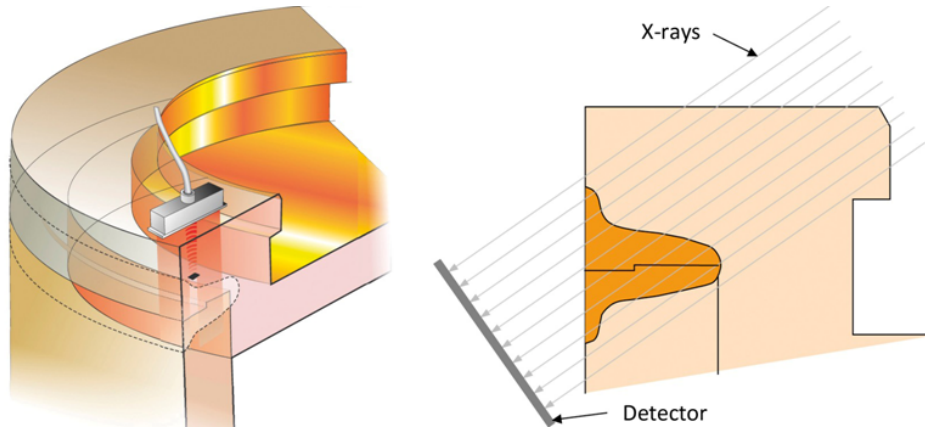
Schematic view of the non-destructive testing that will be performed after every full circumferential weld. The test is capable of detecting the defects that can occur during a weld.
